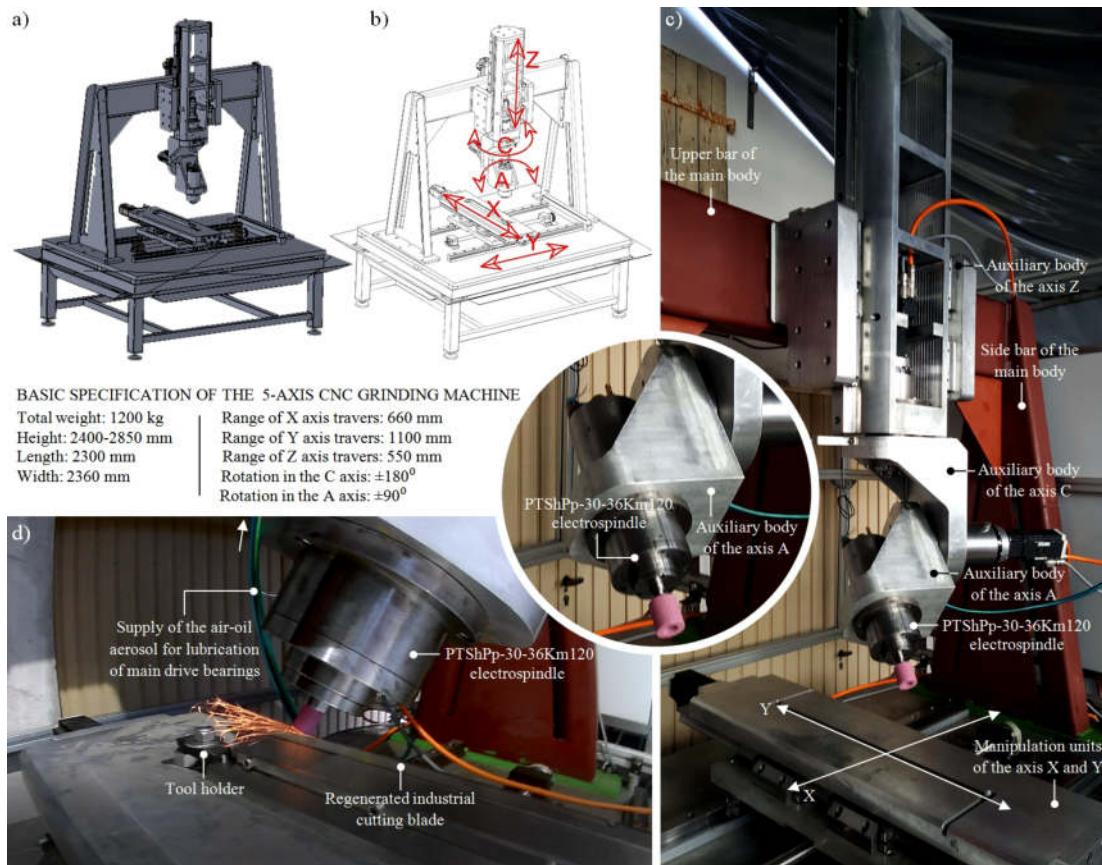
Prototype 5-axis CNC grinding machine for shaping of the industrial cutting tools used in experimental studies: a) computer model of the machine during design process; b) kinetic scheme of the machine with marked directions of axis X, Y and Z motions as well as axis A and C rotation; c) general view of the prototype with main body, guides of the axis X and Y and electrospindle; d) machine during regeneration (grinding process) of industrial cutting blade
